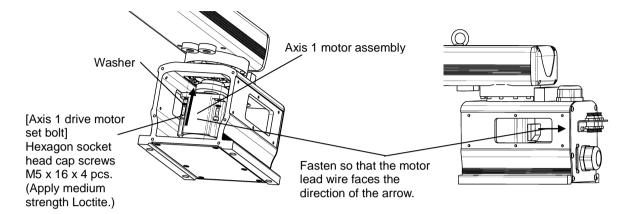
Mounting axis 1 motor assembly (KHL-500, KHL-600, KHL-700)
